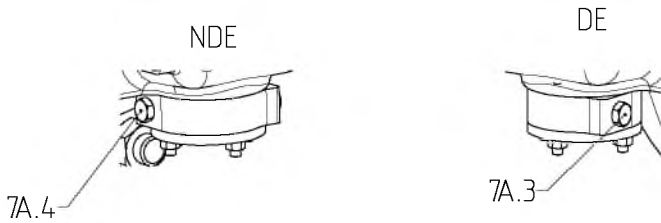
Bearing bracket connections - version with water cooling of oil ring lubrication, view Y
